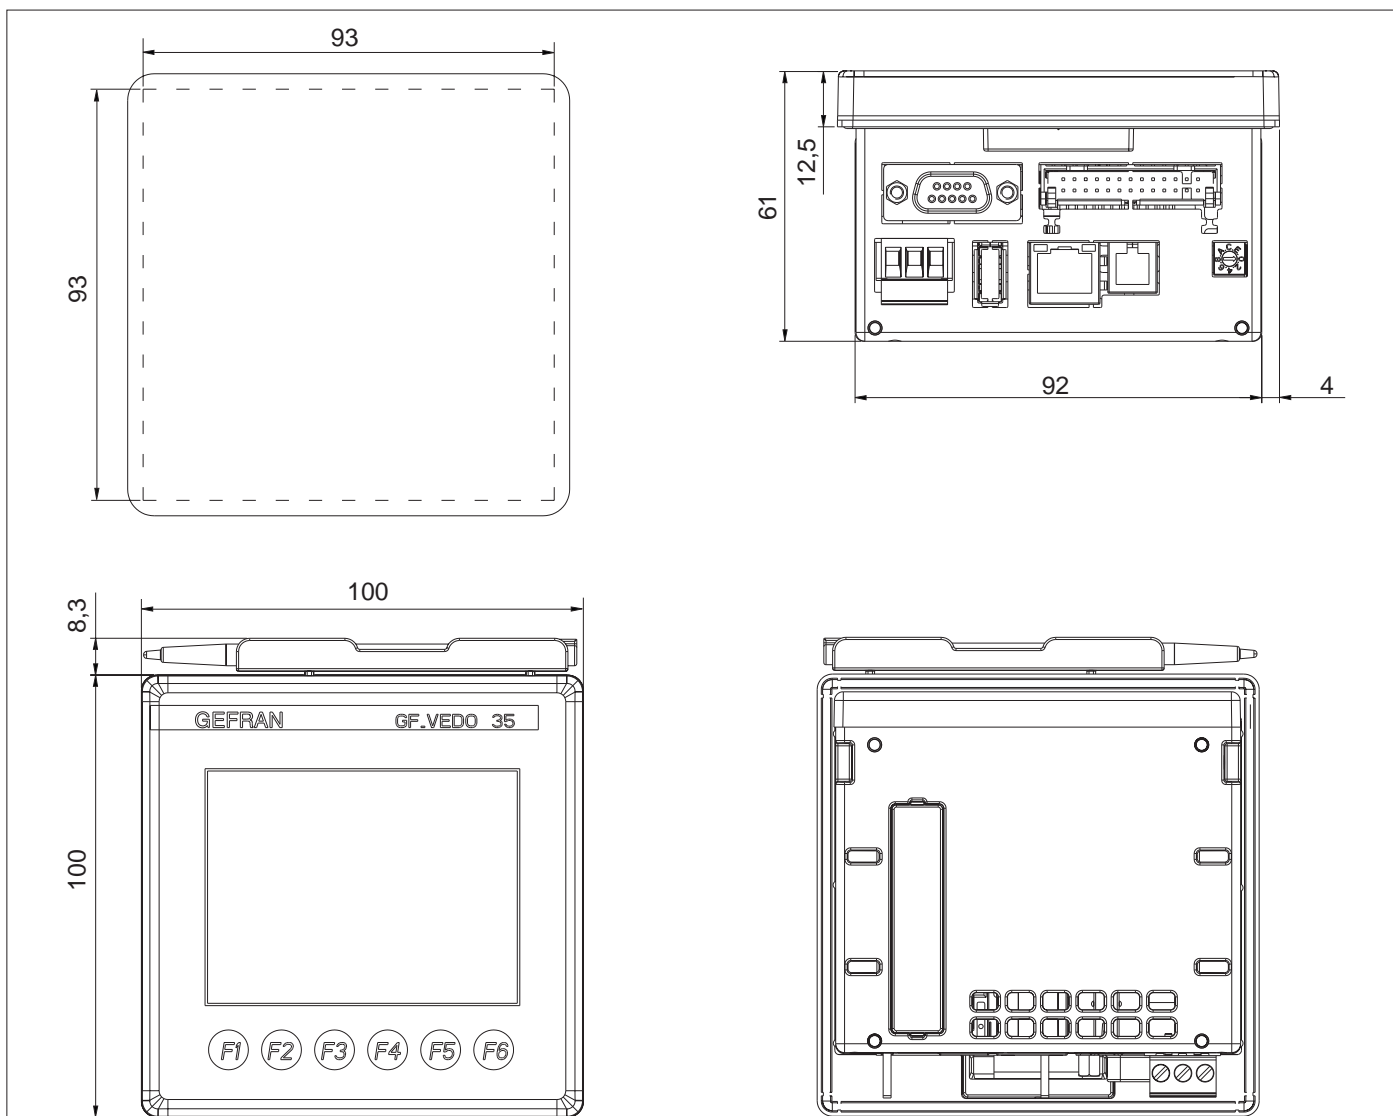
Dimensions and cut-out GF_VEDO EL35CT
